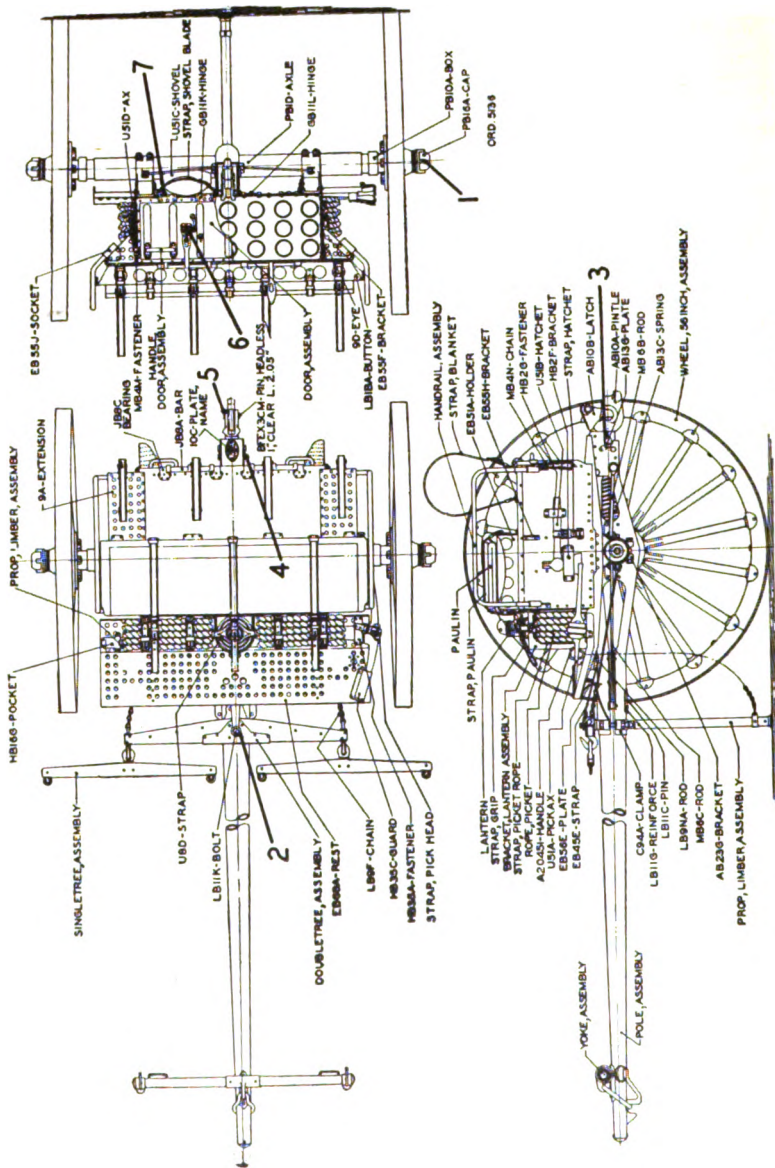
75-mm gun carriage limber, M1918, assembled views
